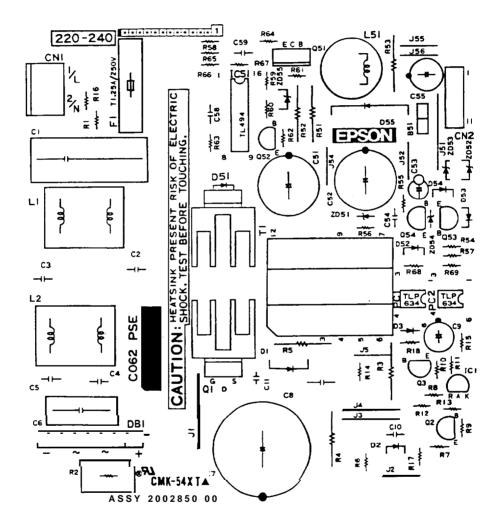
BOARD ASSY., POWER SUPPLY (C062 PSE Board) Component Layout
